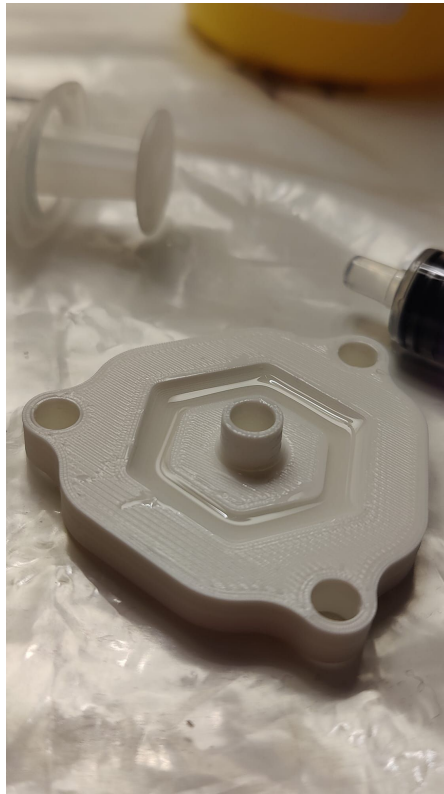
Open-base fabrication: the pneumatic inlet tube is visible, positioned concentrically with the stiffening ring. In the subsequent bonding step, the upper face will be joined to the body and the stiffening disc will be fully encapsulated within the silicone matrix.
